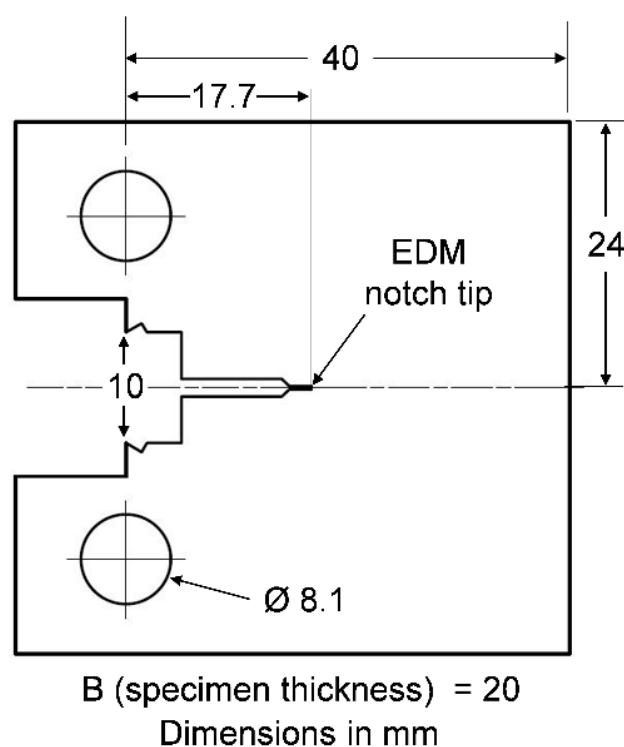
C(T) specimen machining dimensions before fatigue pre-cracking.
